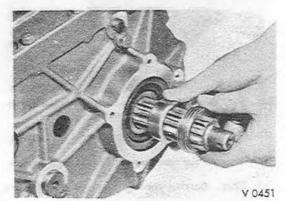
Removing the speedometer drive gear and the spacer from the transfer drive shaft.
